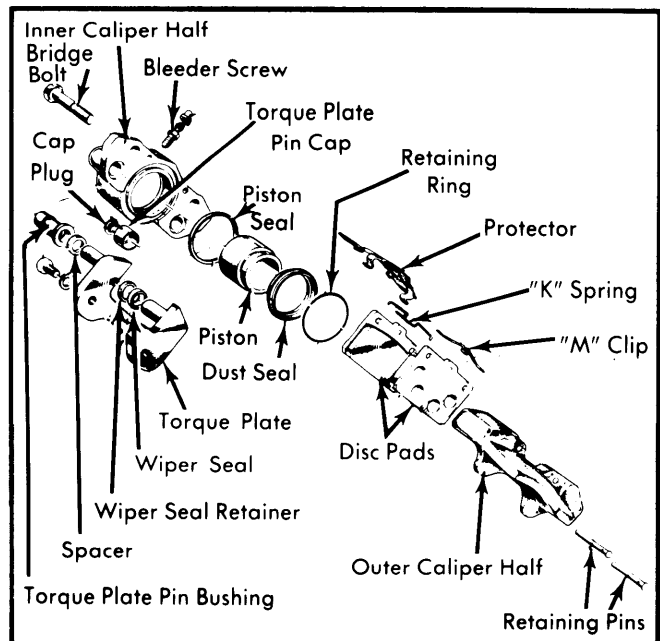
Disassembled View of Disc Brake Caliper Used on Arrow and Colt (Exc. Colt St. Wgn.)
